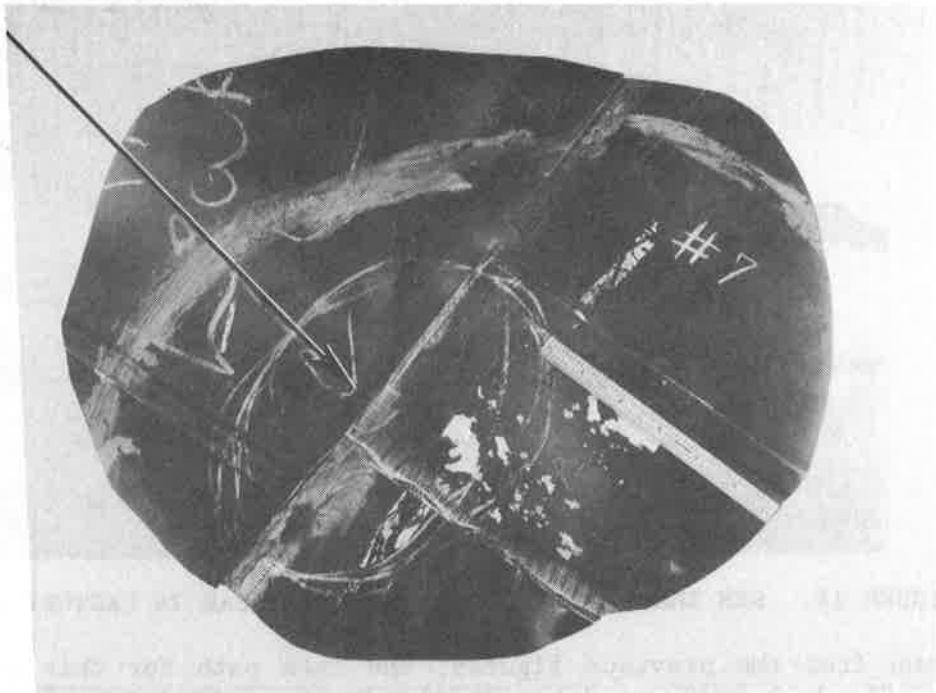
VIEW OF LINER MATERIAL SHOWING THE TWO WELDED LINER PANELS AN ARROW INDICATES THE POSITION OF THE LEAK
